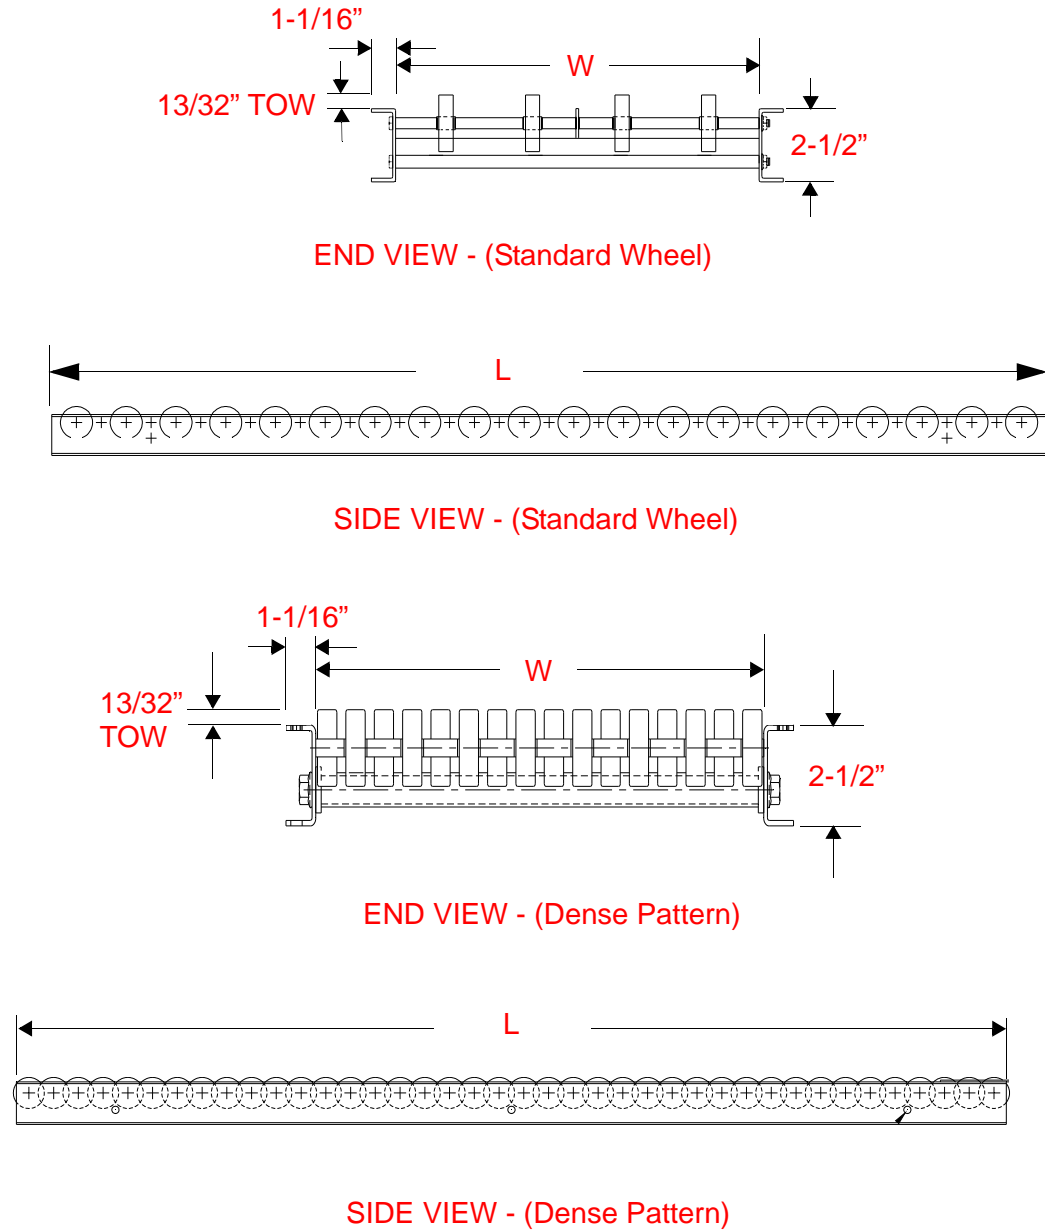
Light Duty Wheel Conveyor - Straight Sections
